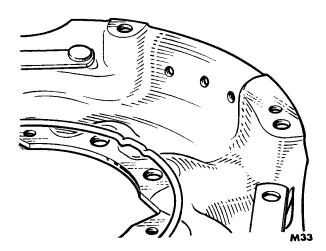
Assembly of cover pressing and fulcrum ring
